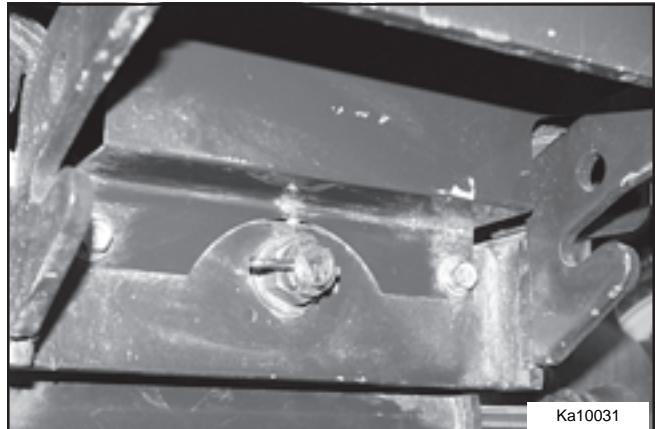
Raise up the front of the tractor up a 2-3 inches (5-8 cm) and support the tractor with a suitable jack stand.
